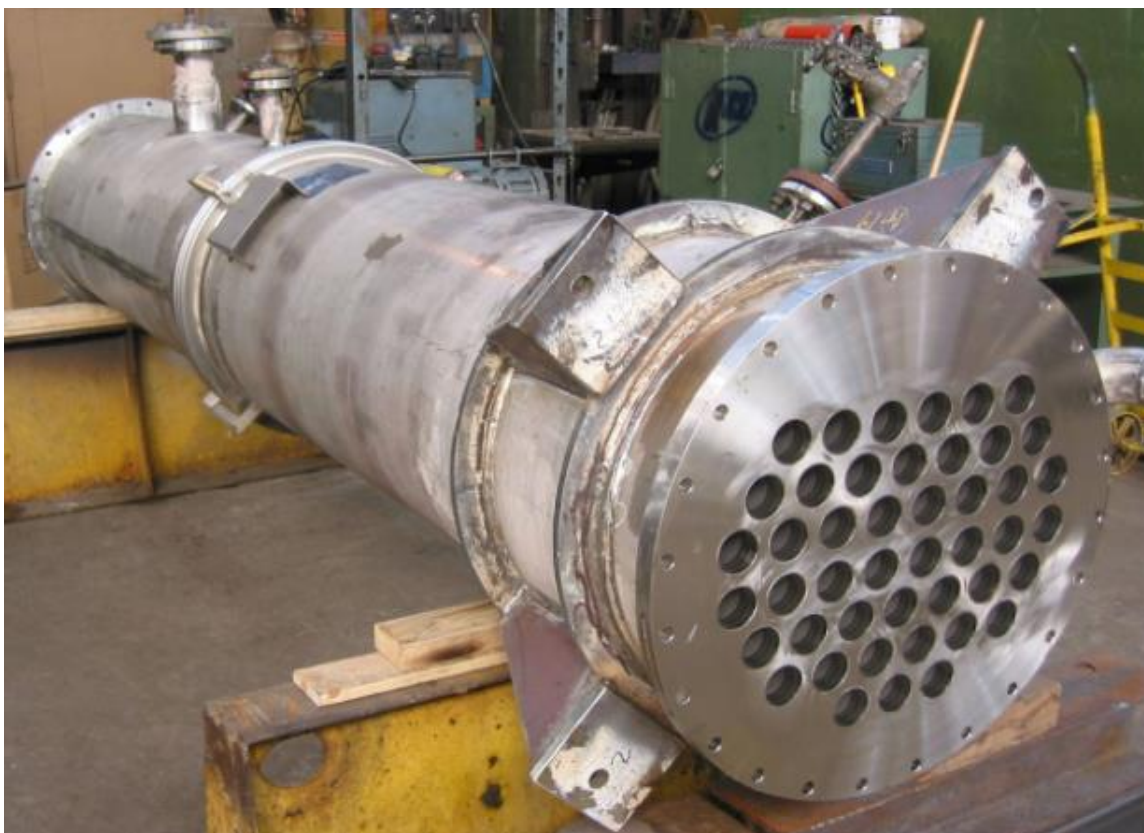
Photo of one body of an installed rising film evaporator.
